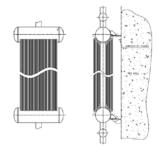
Layout Drawing of APR+ PCCS Heat exchanger (1)
